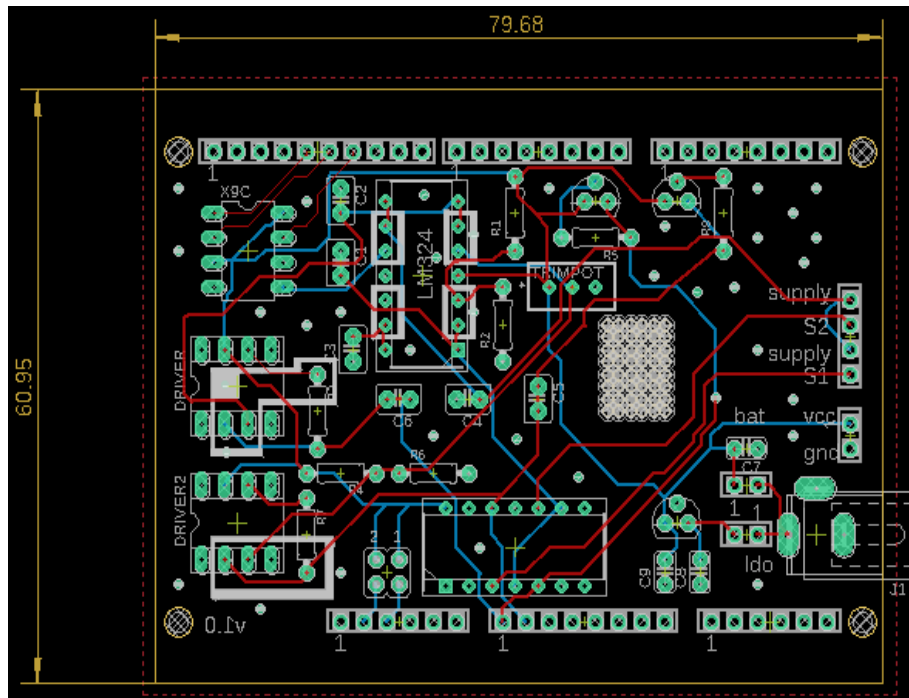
V1.0 layout and its respective pcb PCB
